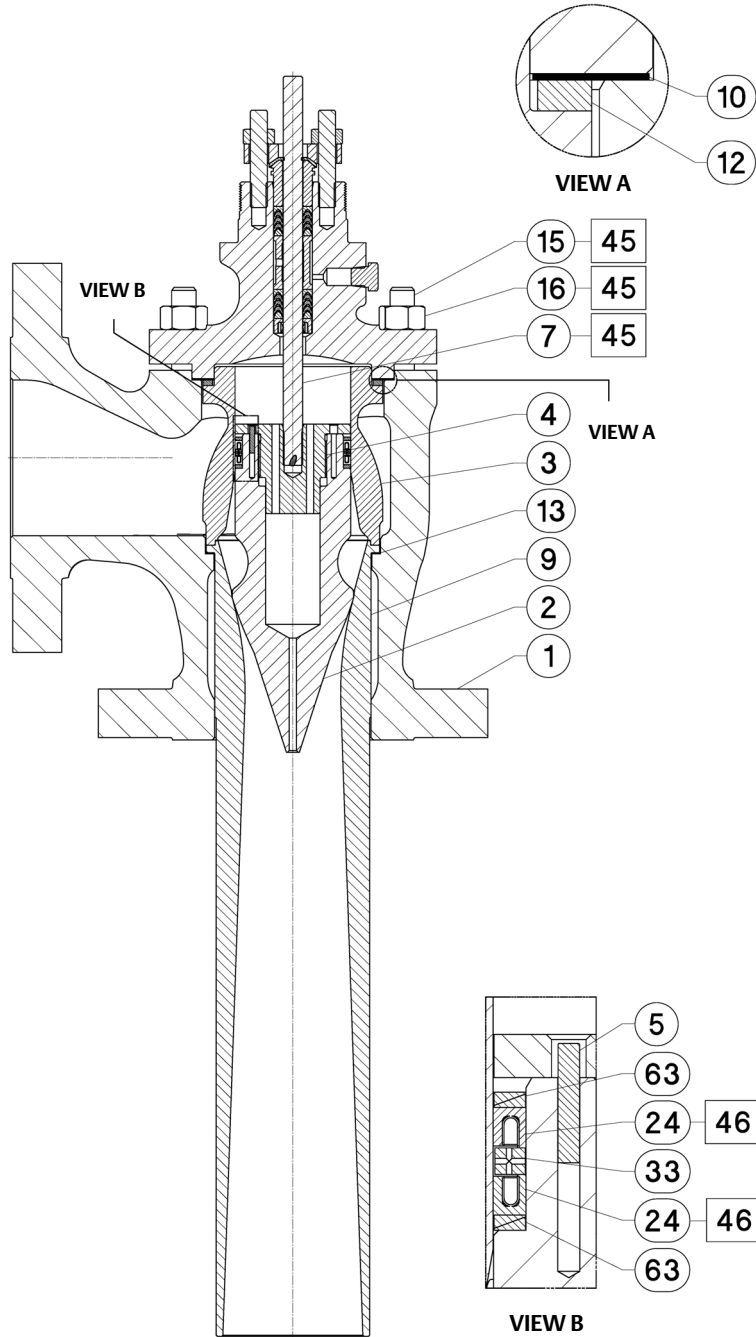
NPS 3 CCV-N Valve Assembly with Key Numbers
